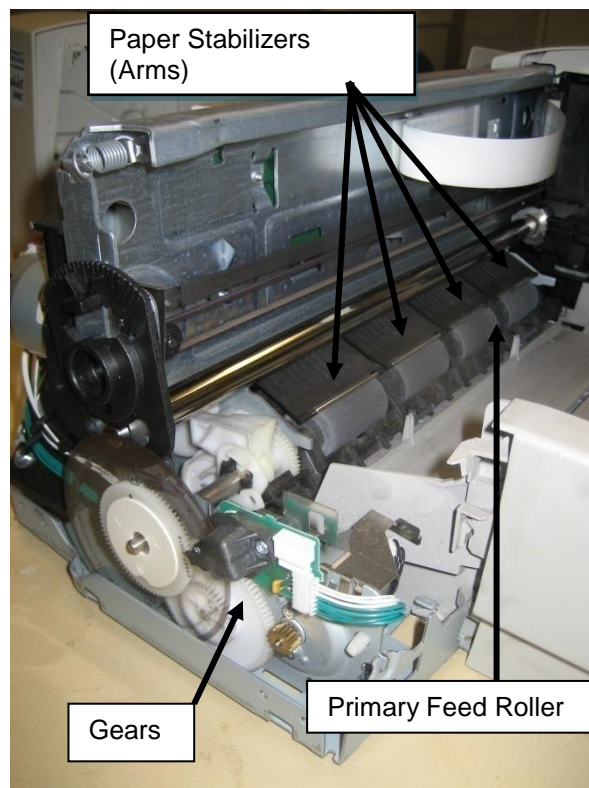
Spring loaded arms; originally designed to hold paper in place during printing
